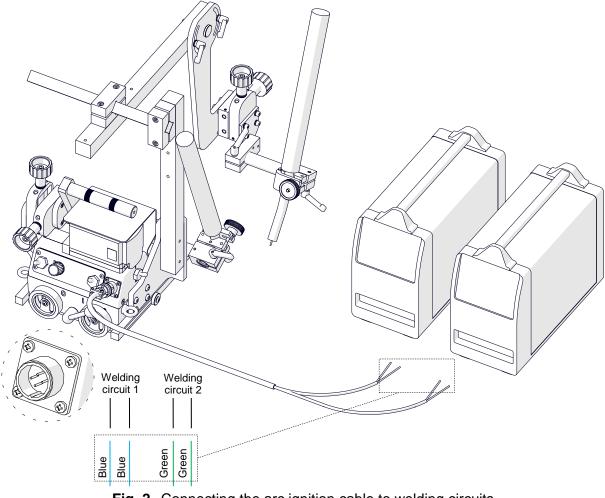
Connecting the arc ignition cable to welding circuits
